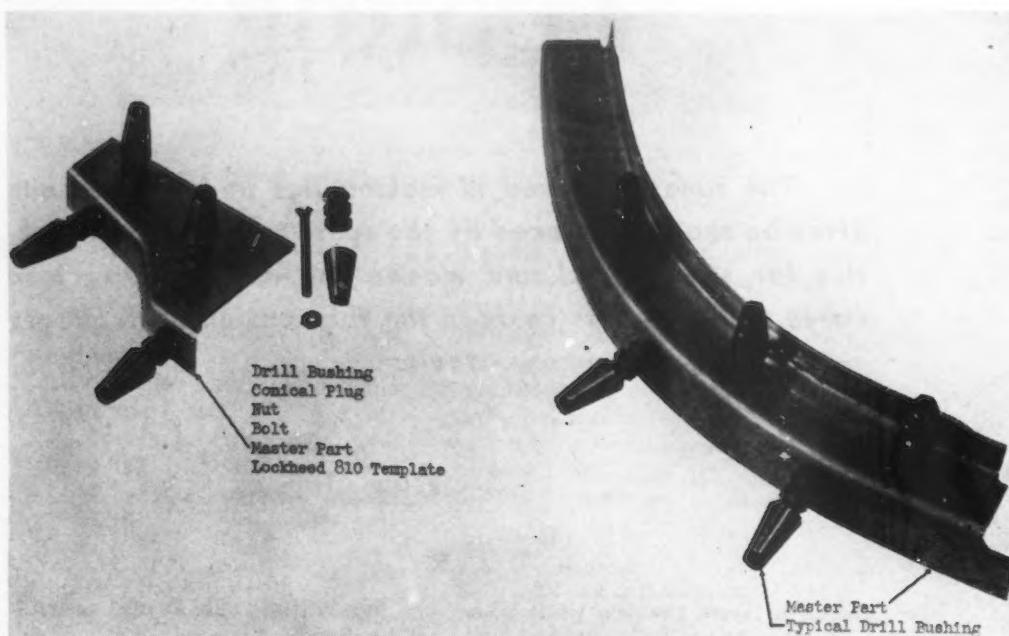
Master part templates around which plastic is poured in making the new type drill jigs. When the plastic has set, the cone-like plugs are removed to indicate the positions of the drill bushings.
